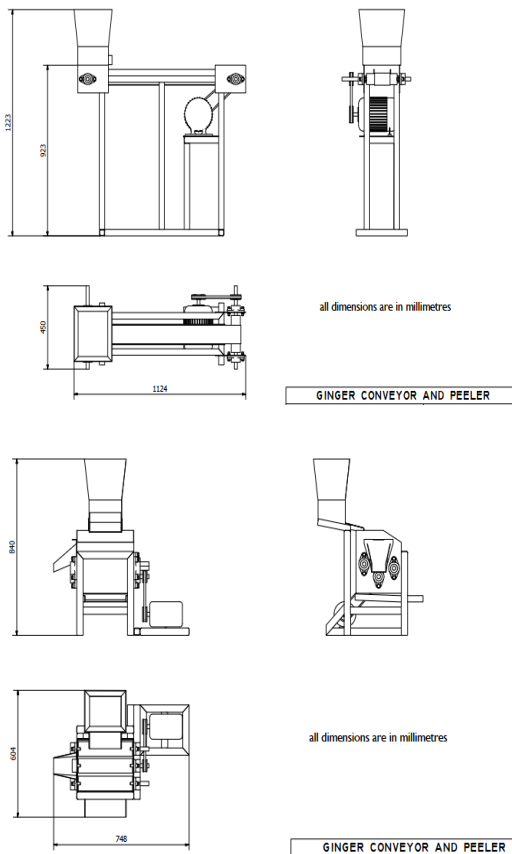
Orthographic Views of Machine; Conveyor Part (Top) and Peeler Part (Bottom).
